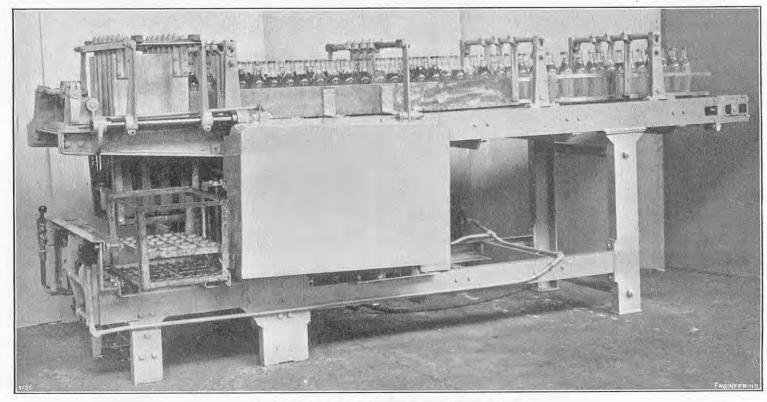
RIGHT-HAND SIDE, SHOWING BOTTLE FEED.
